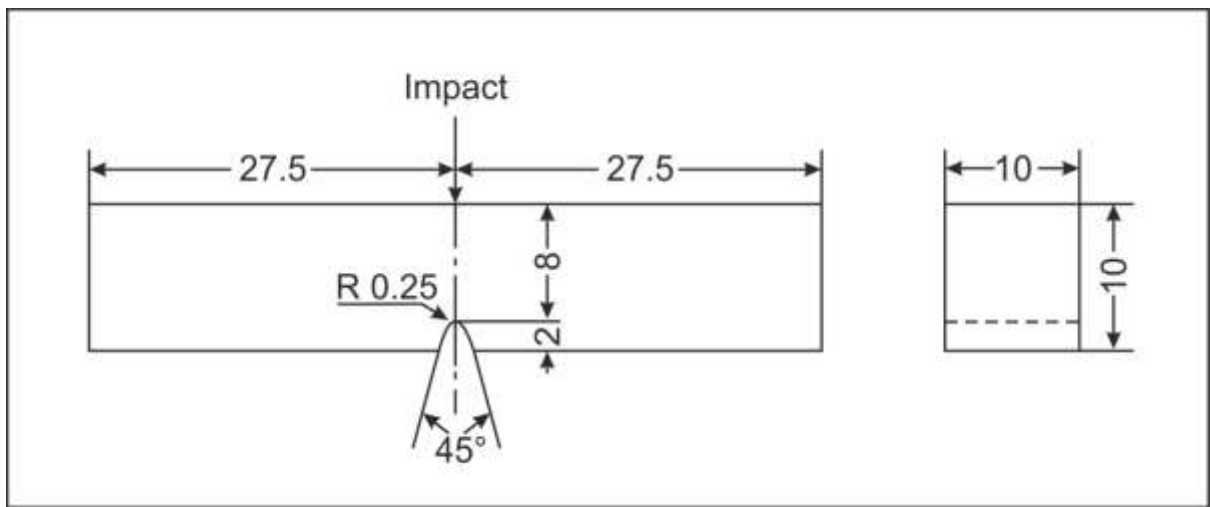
Charpy V-notch impact test specimen as per ASTM E23-12c specification (all dimensions in mm) [226].
